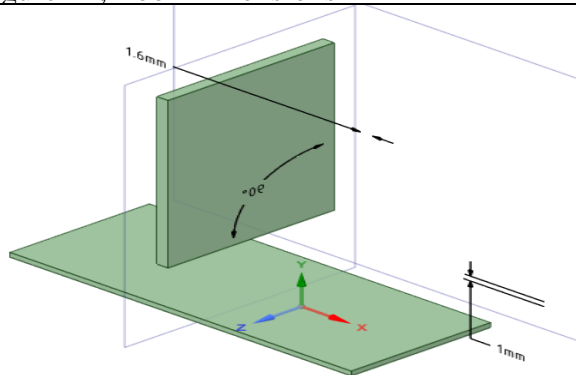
; Tool Thickness 1.6mm, Work piece thickness 1.6 mm (90 Angle)
